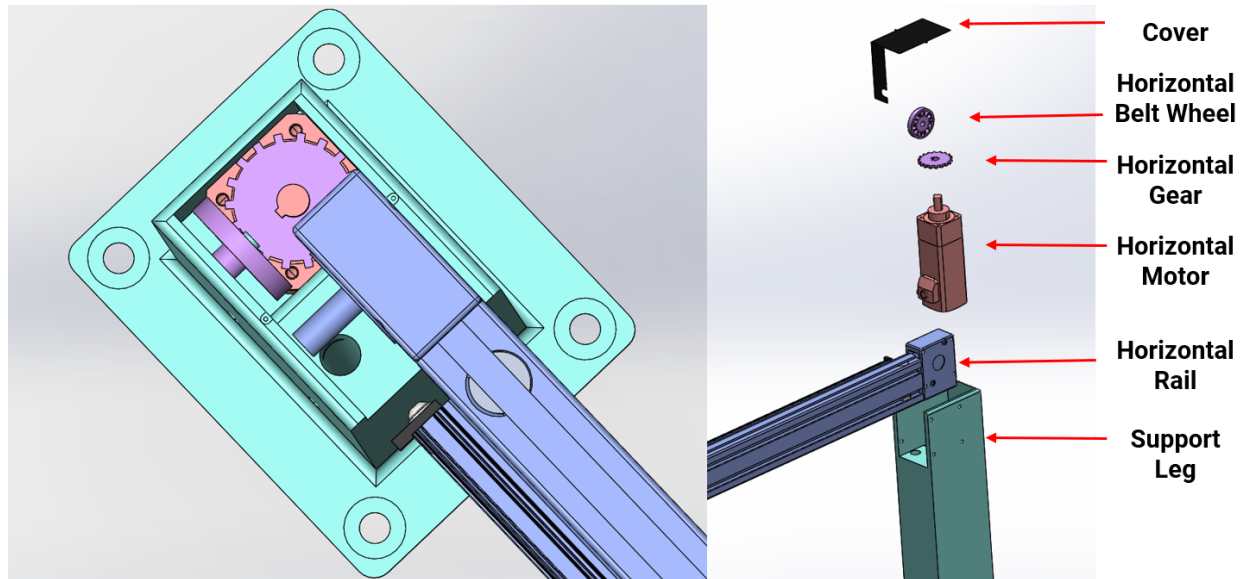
Support Leg with Internal Horizontal Motor (Left) with Exploded View (Right).
